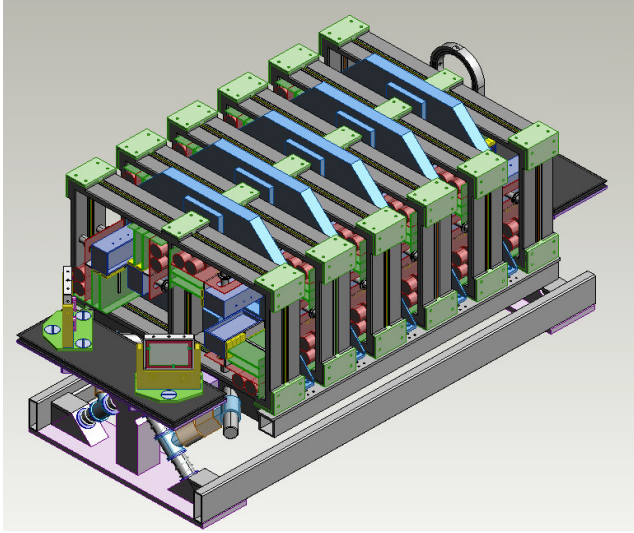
100 kW SSHCL utilizing 5 RSX wheel assemblies
